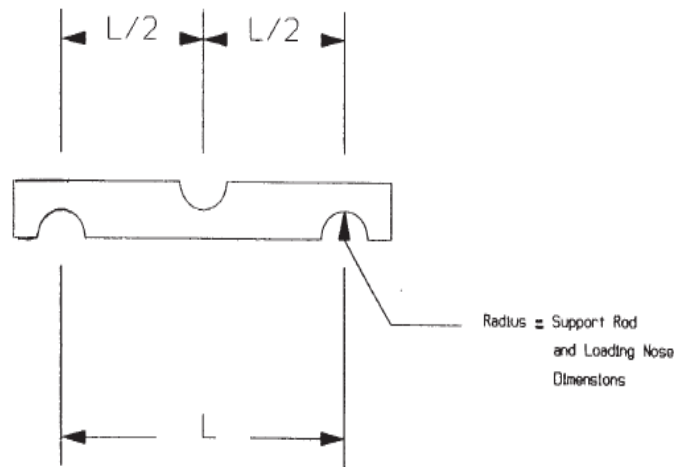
Fixture Used to Set Loading Nose and Support Spacing and Alignment
